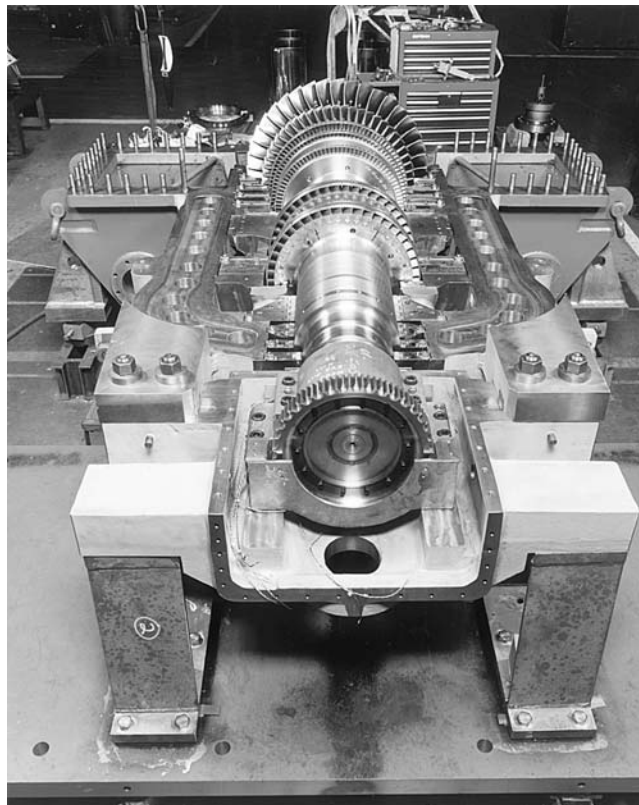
Rotor Supported in Lower Half of Steam Turbine Casing.
